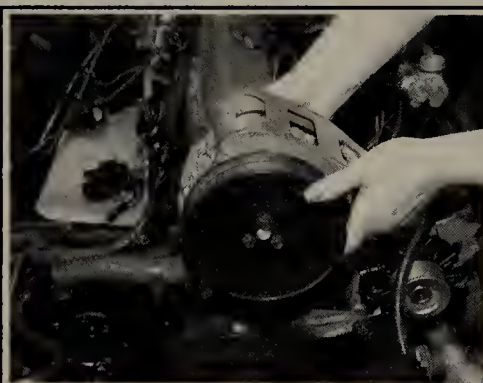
Unfasten the retainers, then remove the AIR pump and bracket, as an assembly, from the engine
